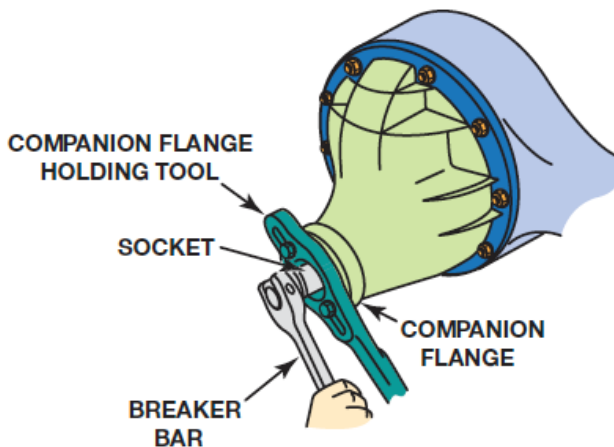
Use a holding tool and breaker bar to remove the pinion nut.
